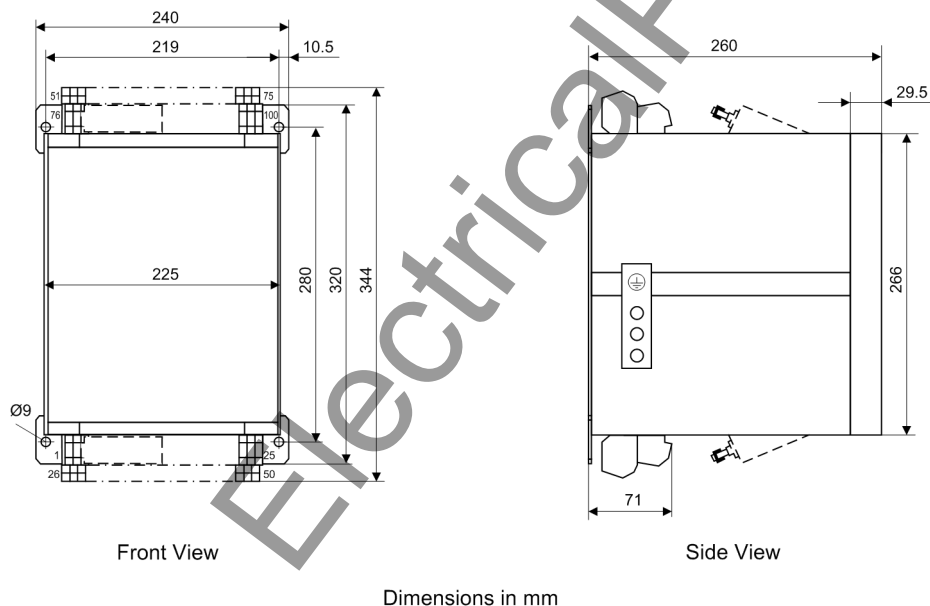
Dimensional drawing of a 7VK611 for panel surface mounting (housing size  $\frac{1}{2}$ )
